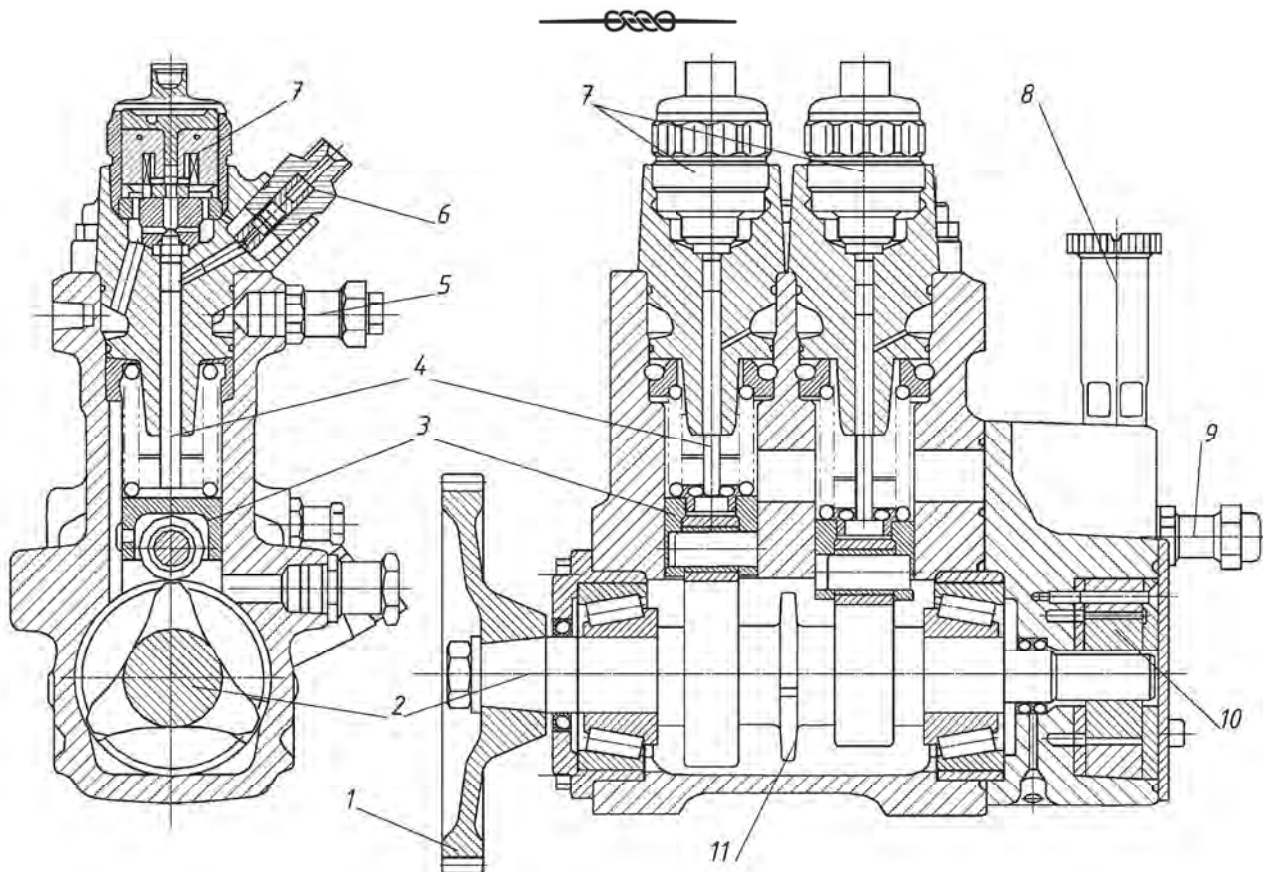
In-line plunger pump type HP0 from Delphi for Common Rail systems of high-speed diesel engines: 1 – drive gear; 2 – drive shaft with cams; 3 – plunger pusher; 4 – plunger; 5 – bypass valve; 6 – high pressure line connection fitting; 7 – solenoid valve for supply control; 8 – booster pump; 9 – pressure limiting valve in the pumping line; 10 – booster pump; 11 – cam with a mark for the speed sensor (adapted from [70])
